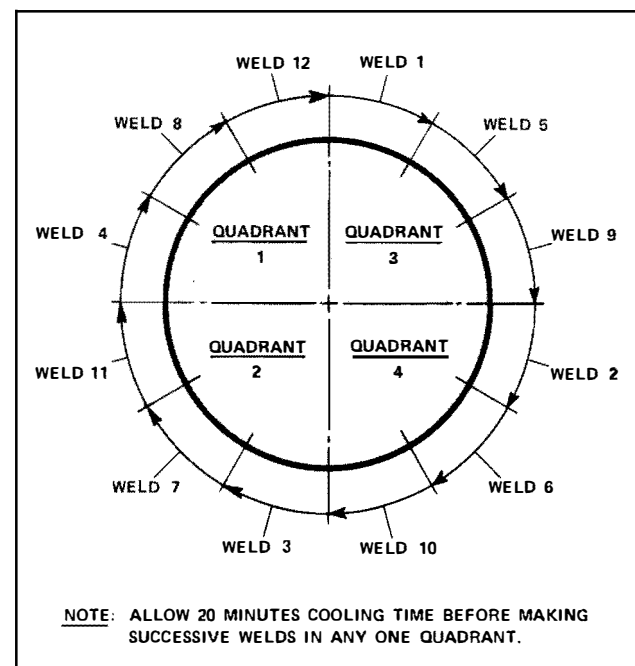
CRW Bushing Installation Welding Procedure When Using the Wet Asbestos Method of Cooling Bushings
